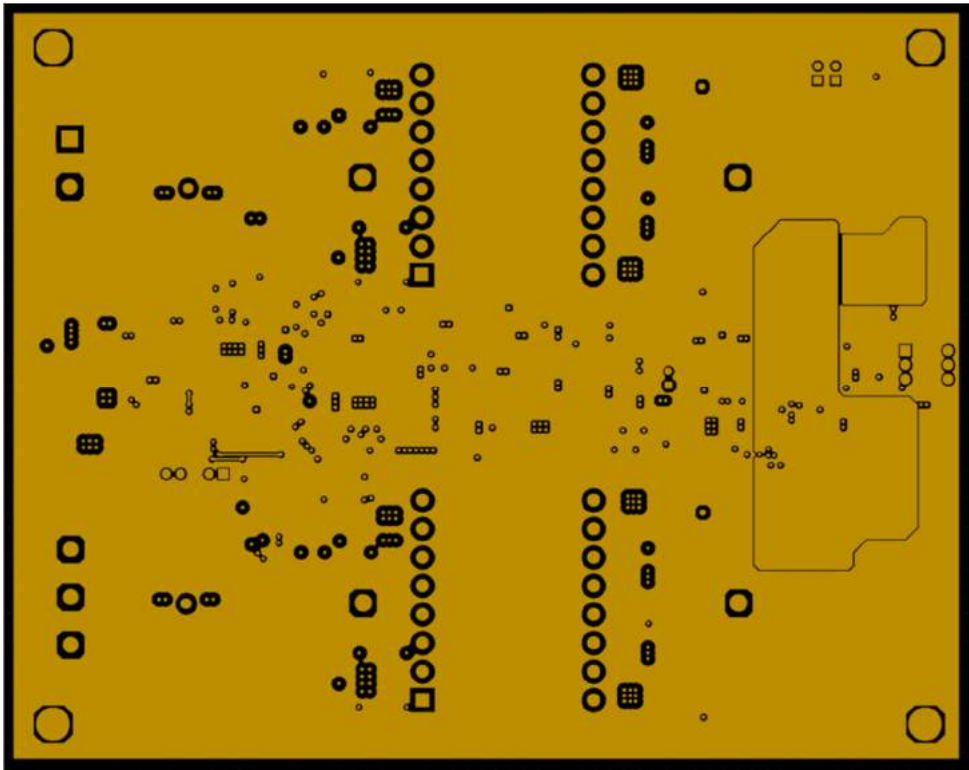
Middle-2 copper layer of the 4-layer PCB
